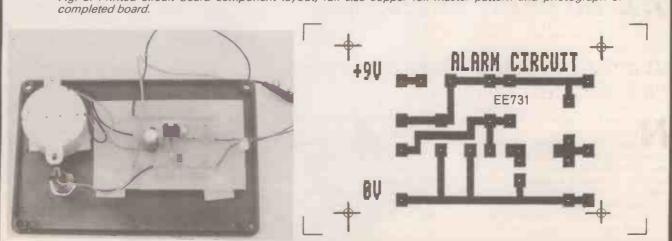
Printed circuit board component layout, full size copper foil master pattern and photograph of completed board.
